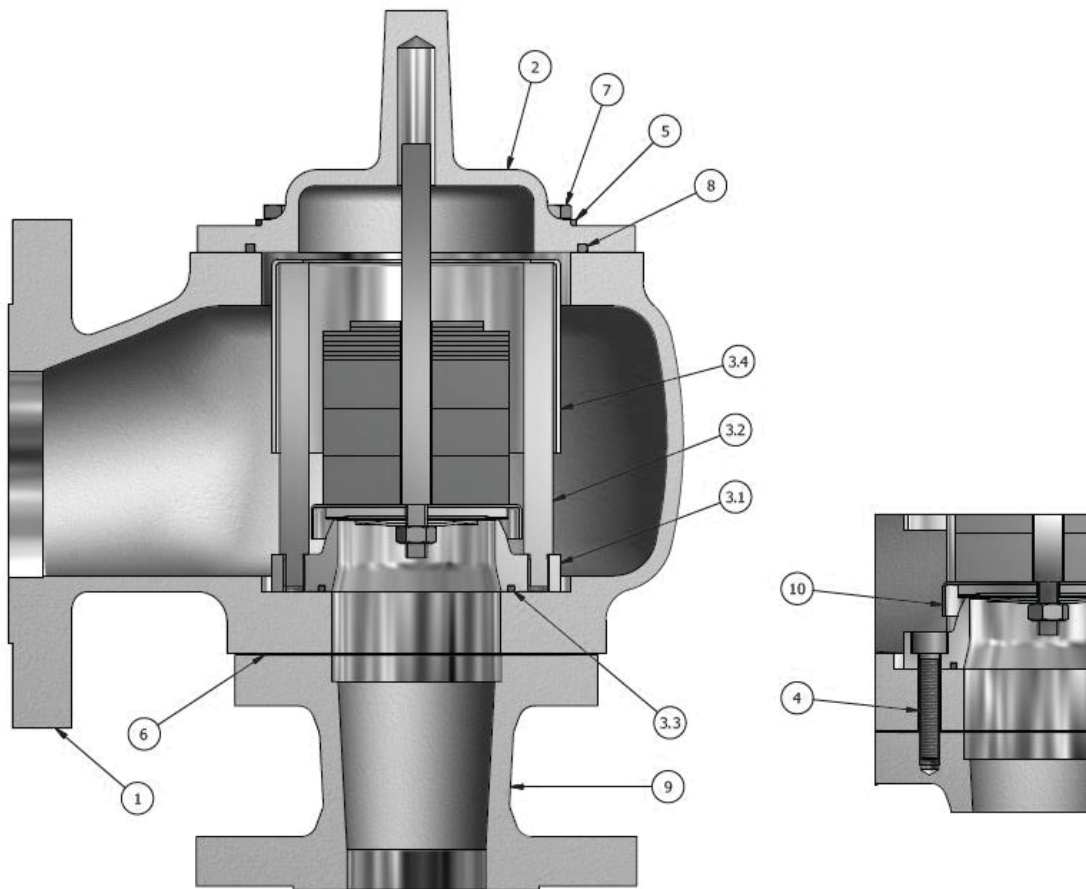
Type 4142HV Vacuum Relief Valve Assembly
